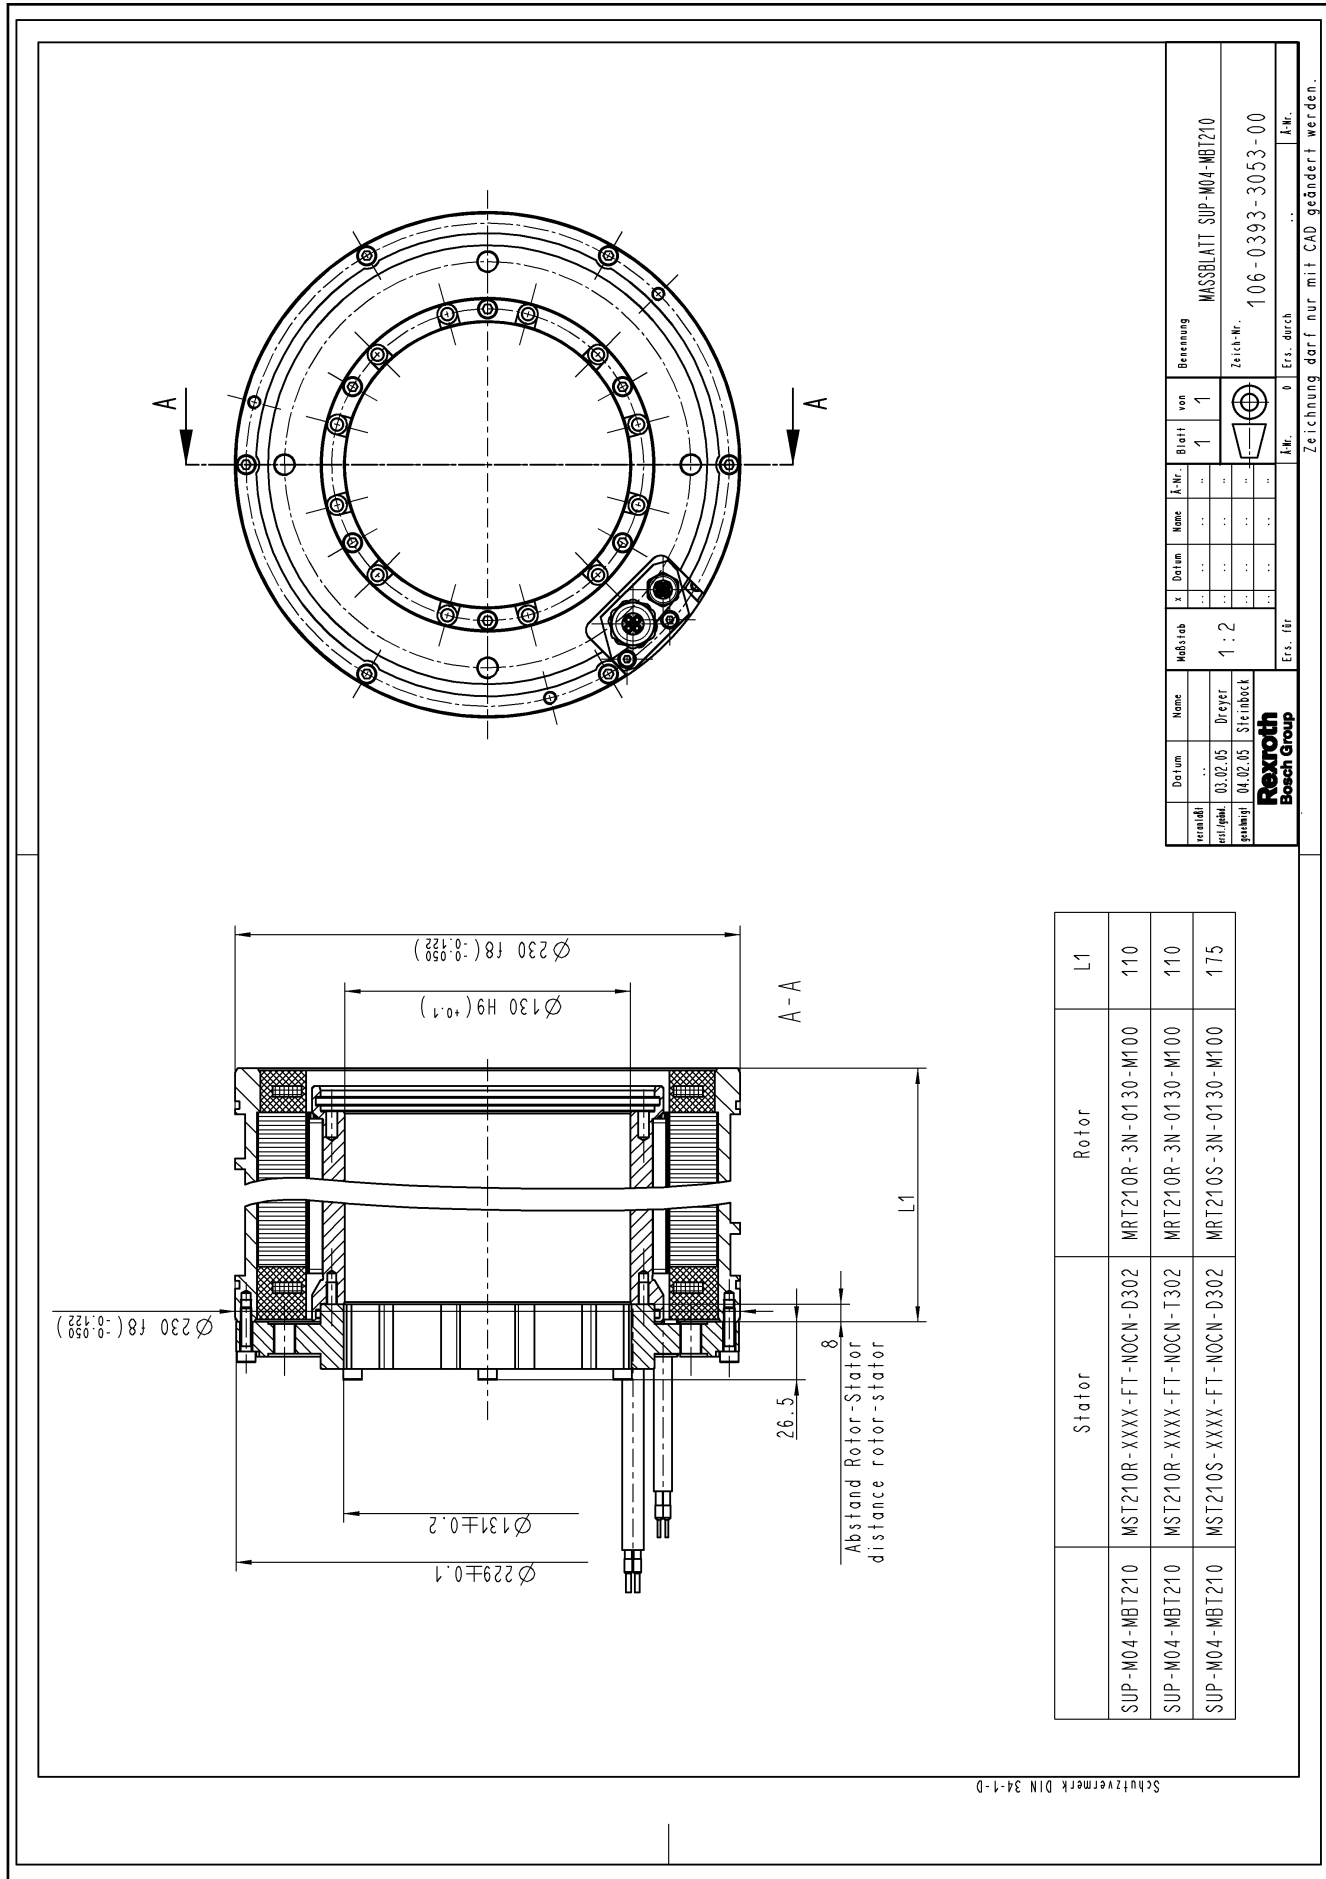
Dimension sheets SUP-M04-MBT210
